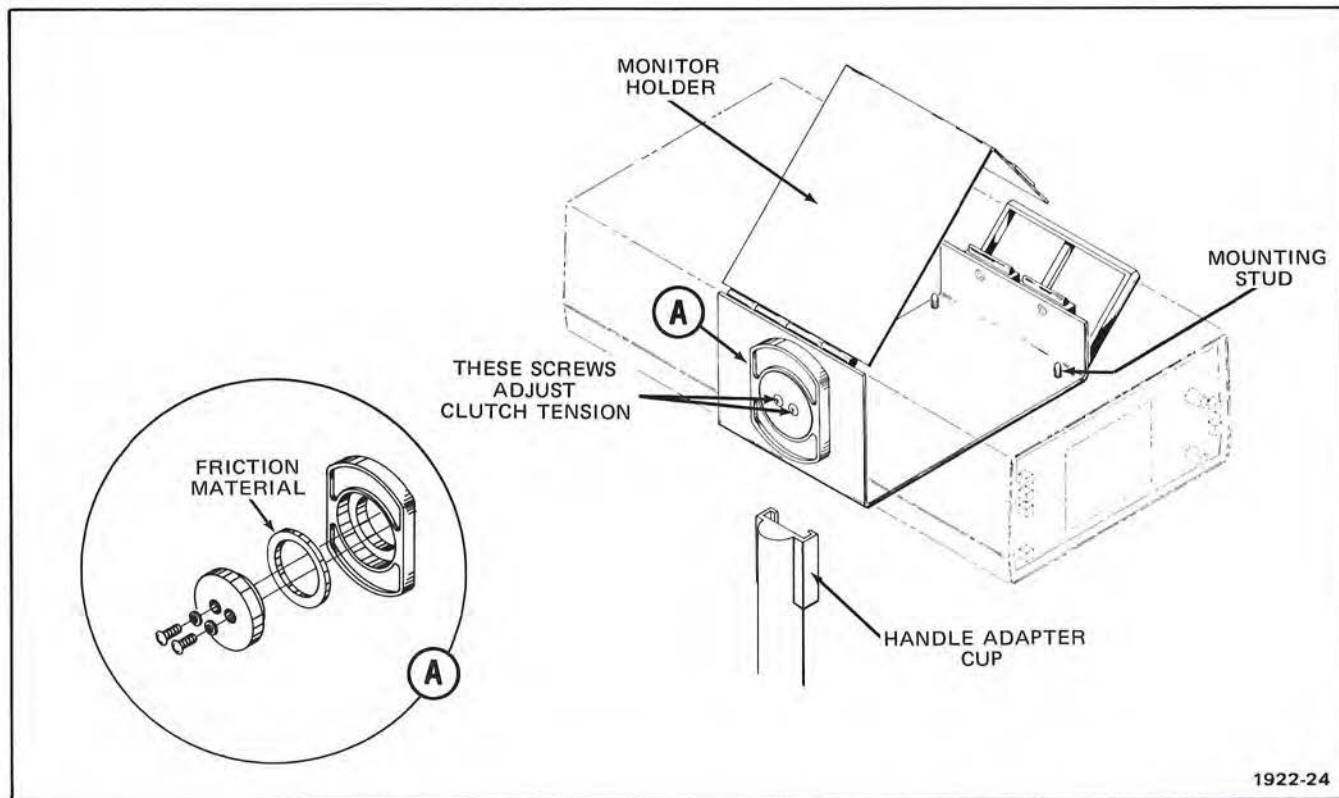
208 monitor mounts in the Monitor Holder and the Monitor Holder mounts onto the Mounting Kit.
